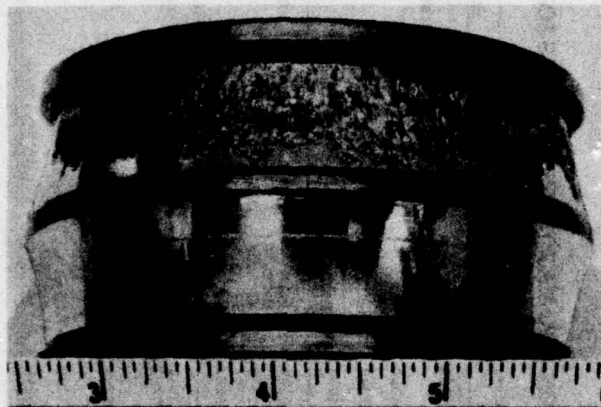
Spalled Inner Race of the 114DS282 Planet Assembly.
